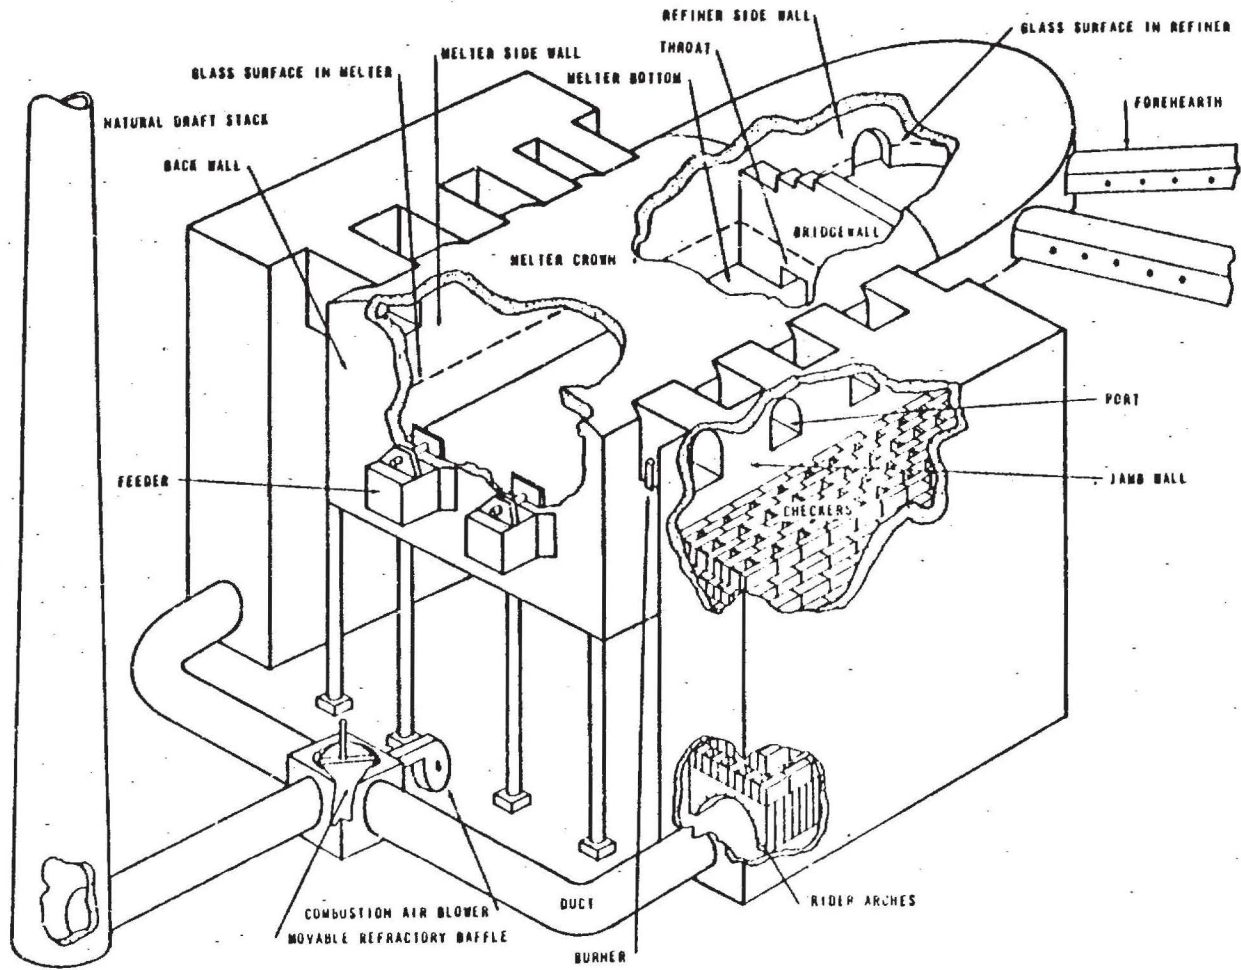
Glass melting furnace (side port). Similar to Test 20 furnace (Ref. 4-17).
